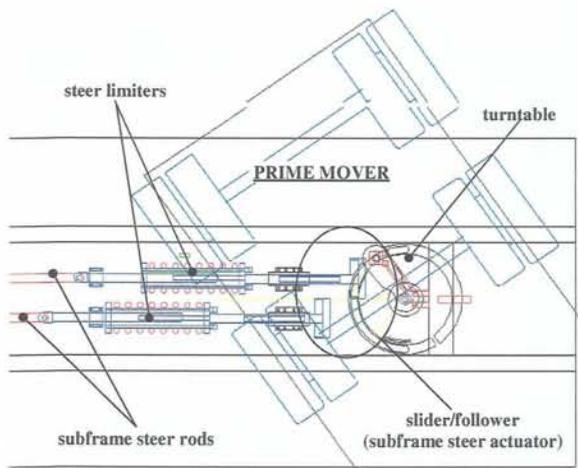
Schematic showing subframe steer-actuating mechanism and steer limiter spring arrangement.
